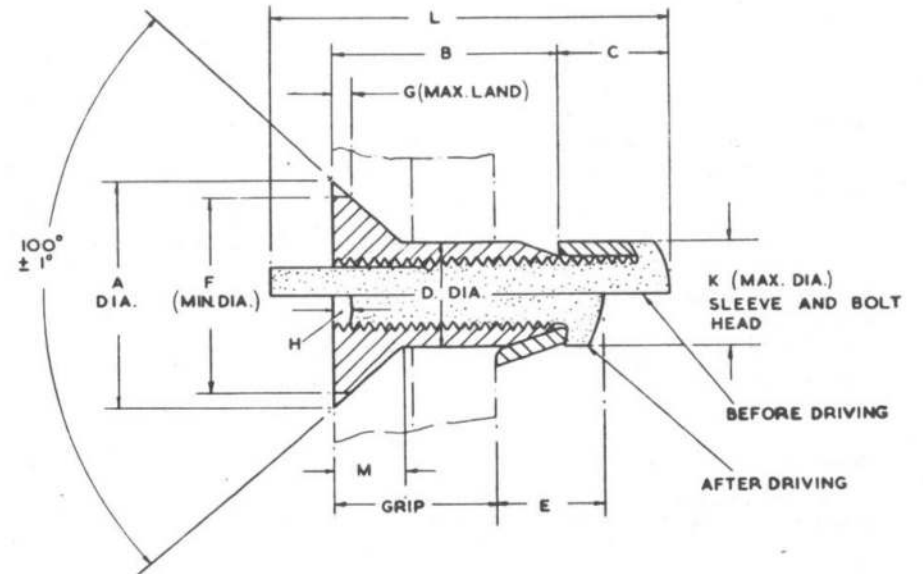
Countersunk-headed Jo-bolt, general dimensions
